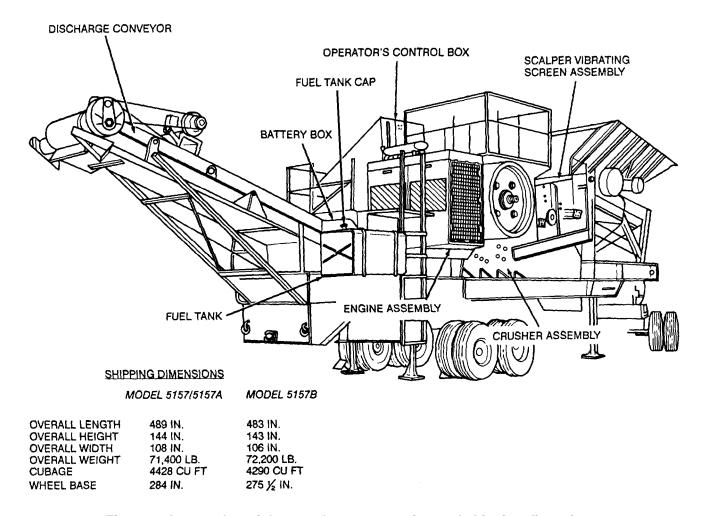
Jaw crusher, right rear, three-quarter view and shipping dimersions.
